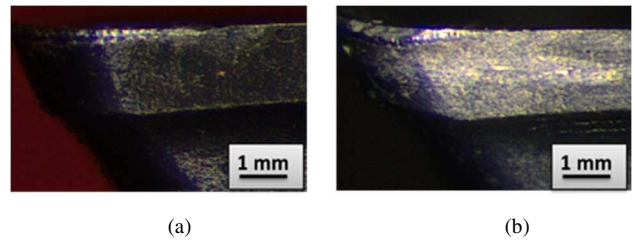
Flank wear (Vb) on MQL machining of (a) SLM and (b) C&W.
